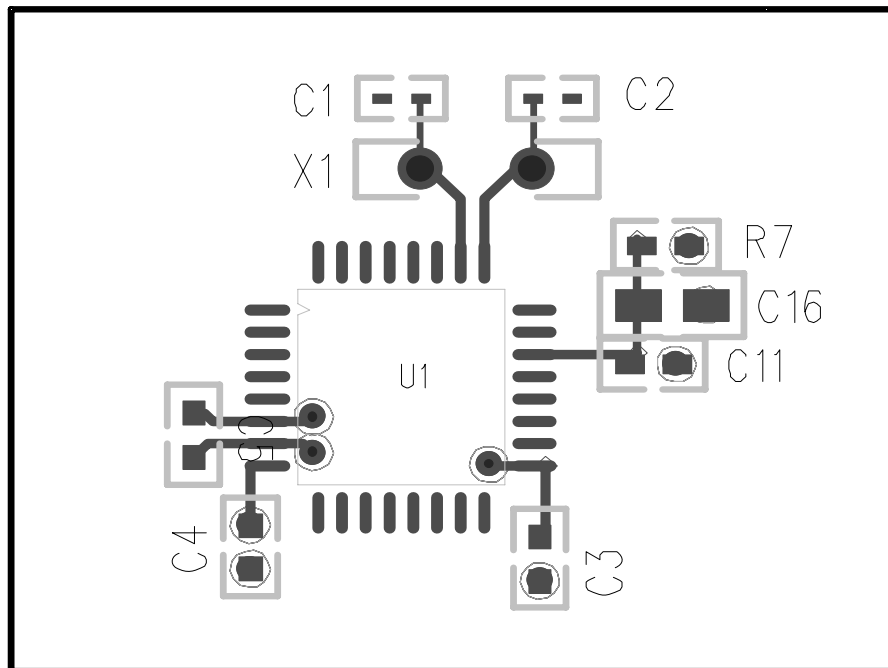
B. PCB BOARD LAYOUT FOR ICS84314-02
